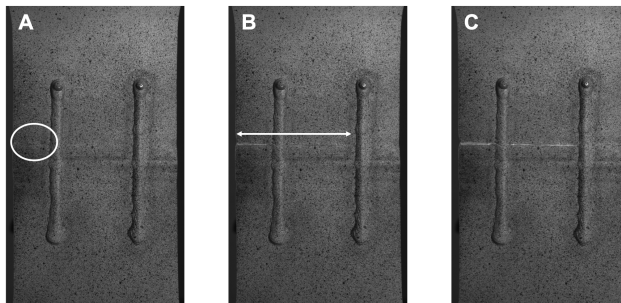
Fracture of specimen with cross weld speed 26 mm/s, with PWHT.
